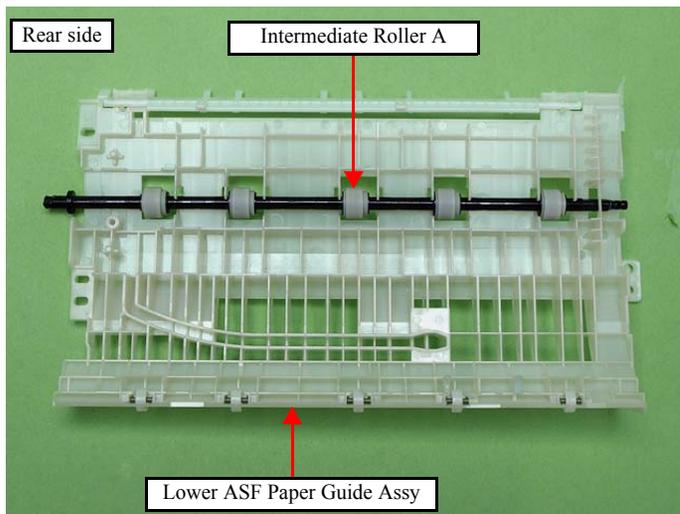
Removing the Lower ASF Paper Guide Assy (4)
